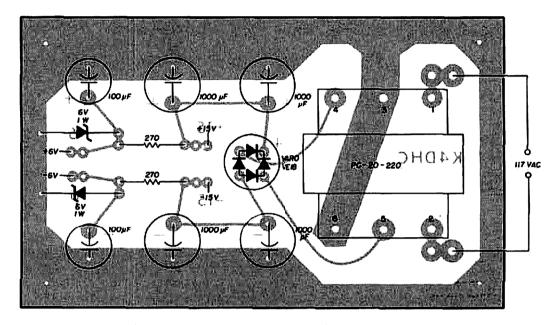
Full-size component layout for the power supply. Printed circuit is shown in fig. 8.
